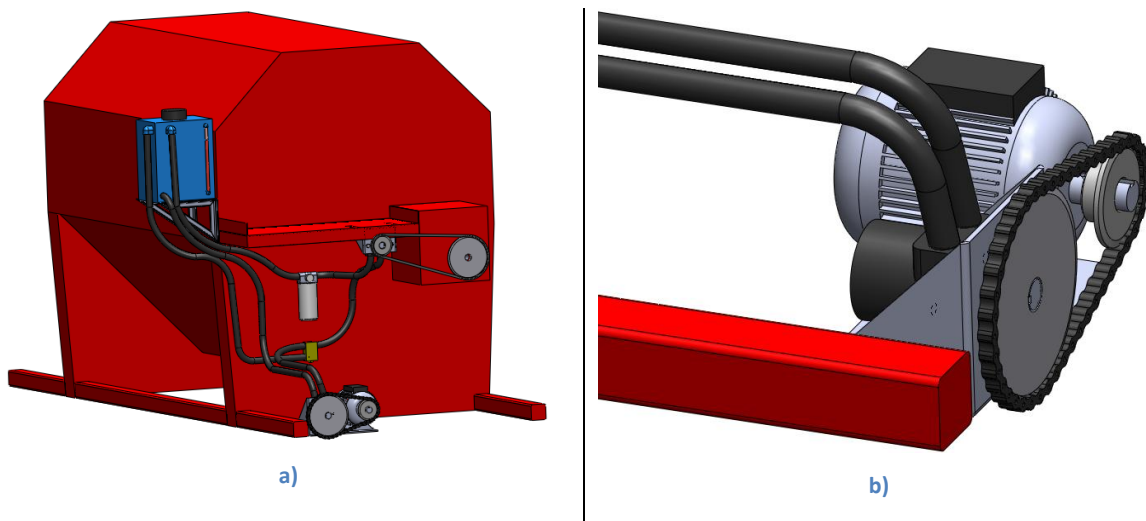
a) Experimental test setup. b) Electric motor close-up showing gear reduction.
